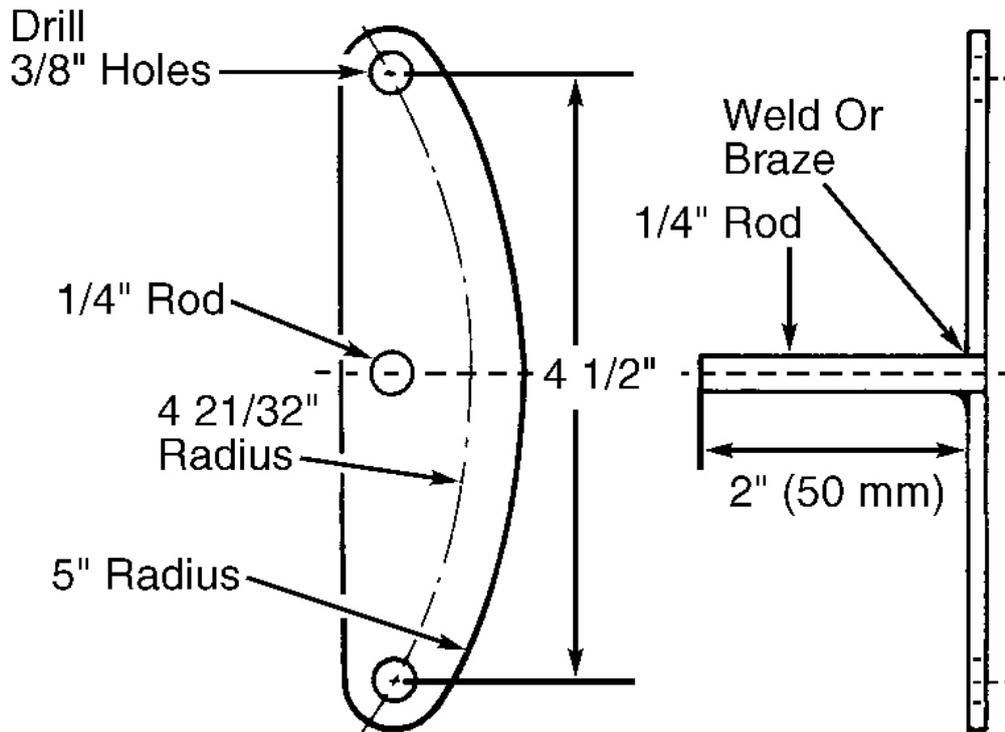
Fabricating Torque Converter Hub Seal Cup
